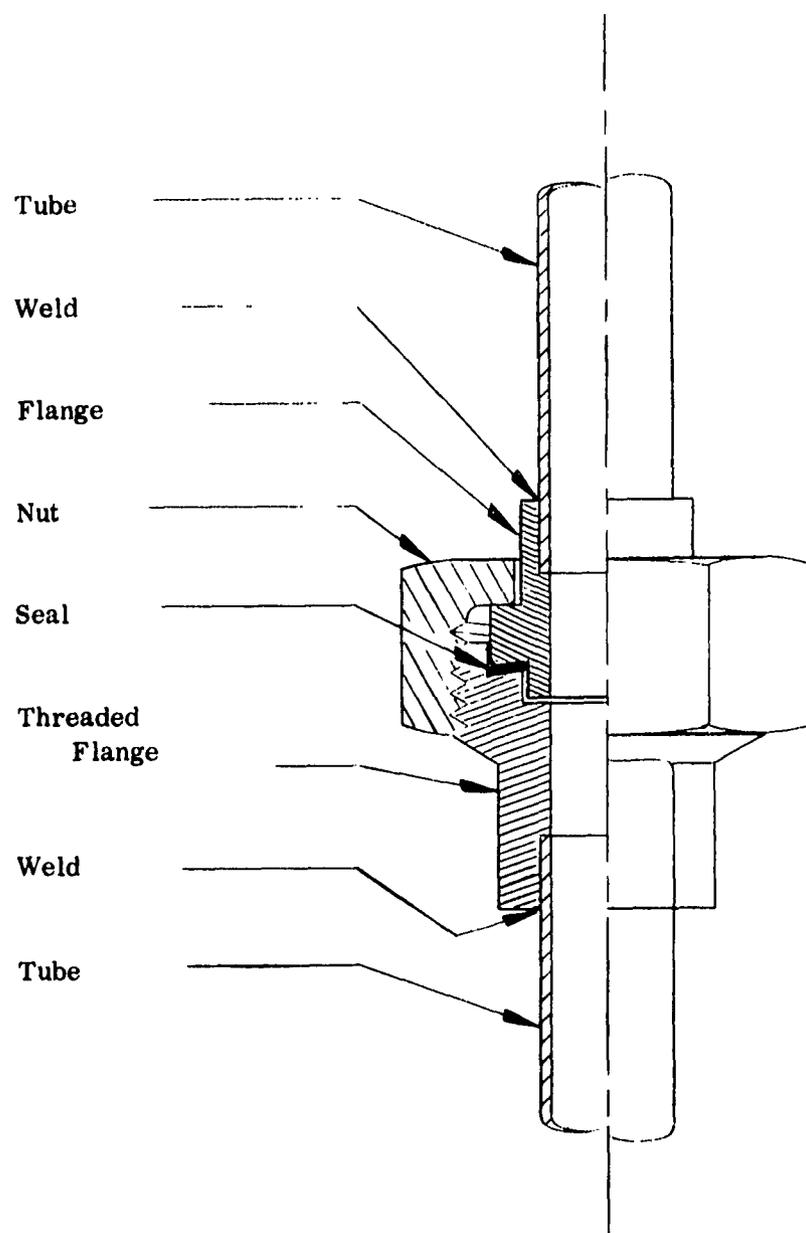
CONOSEAL TUBE FITTING, ASSEMBLY DRAWING
